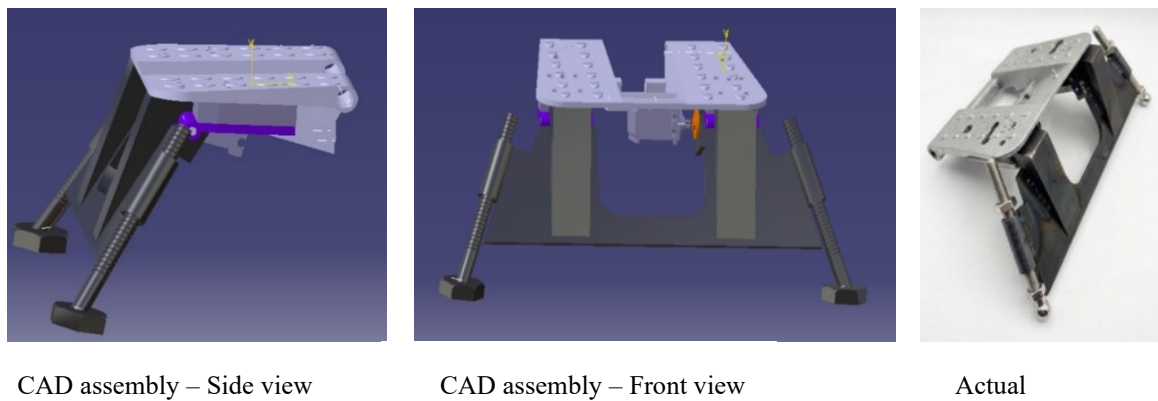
Final automatic footrest stand: CAD model and fabricated prototype
